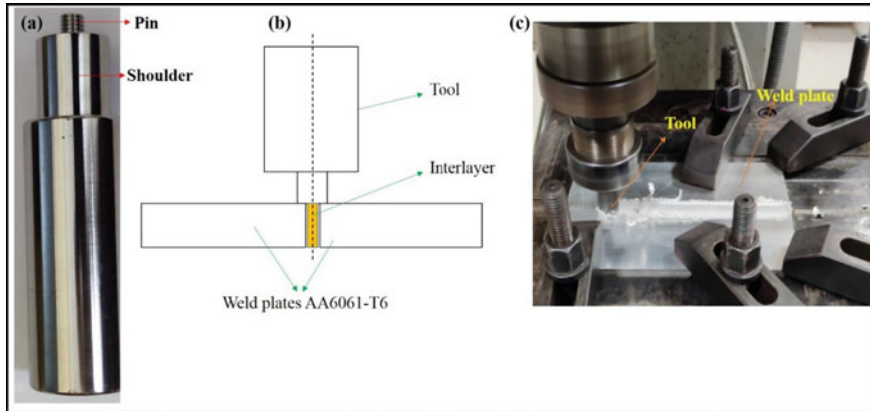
a Cylindrical profiled tool with threading, b representation of FSW with interlayer, and c actual welding process
